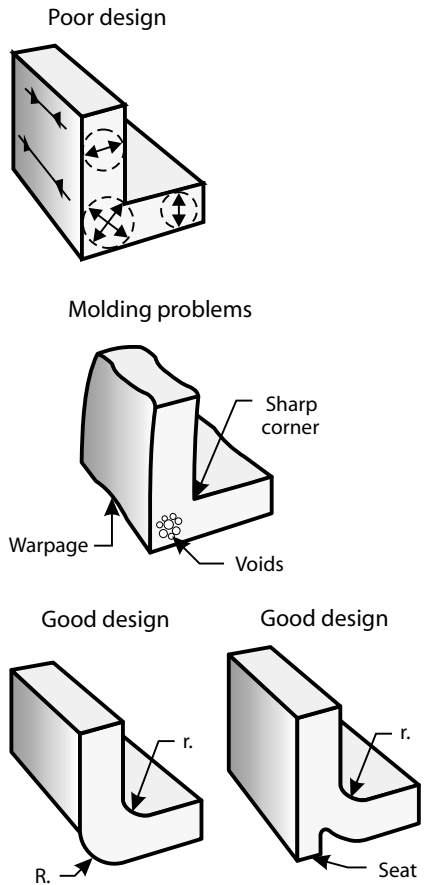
shows a poor cross section design of perpendicular corner walls that causes molding problems, such as differential shrinkage, warpage (concave) of both walls, and internal voids in the corner of the thicker wall. The last two designs are recommended to avoid these molding problems.
